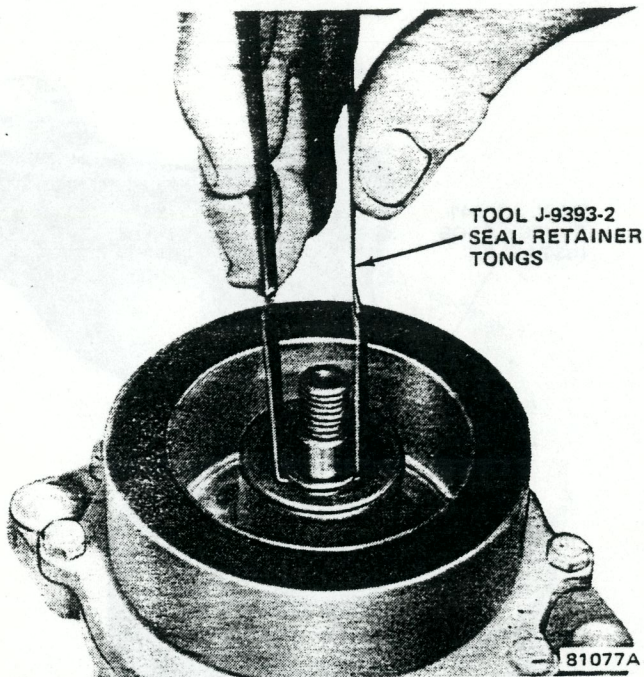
E-28 Removing Shaft Seal Seat Using Tongs
